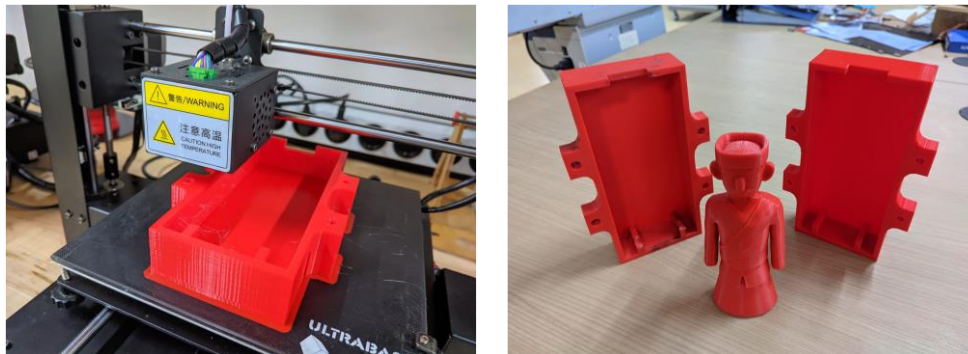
3D printing process of master mold casing (left) and the final master set consists of master pattern and master mold casing (right).
